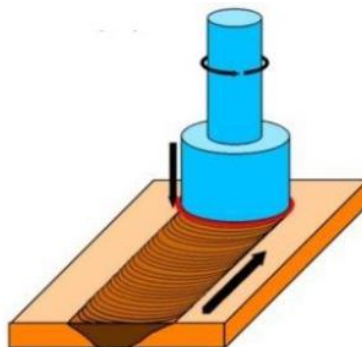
Stage 4 of the Friction Stir Welding Process – Feeding of the Weld
